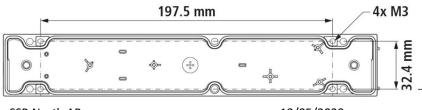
bottom plastic part of Safety Simplifier showing four mounting holes for M3 screws. See Figure 5-7 for mounting accessories.
